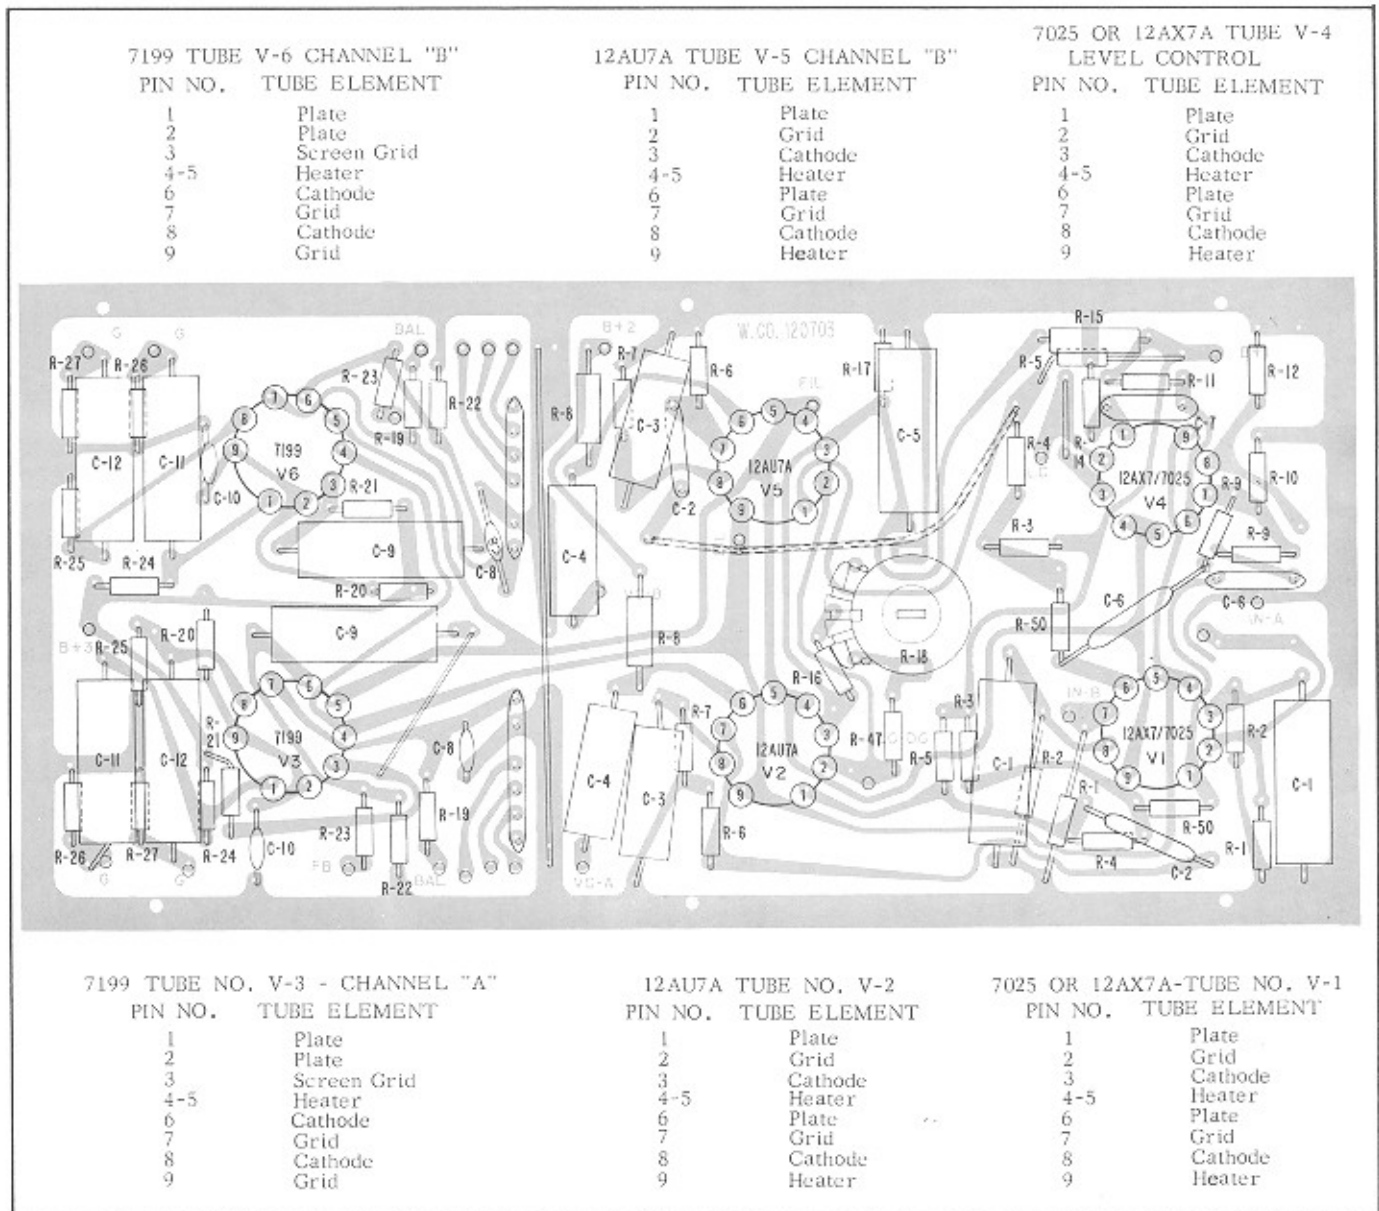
PRINTED CIRCUIT BOARD, MODEL 545 DUAL CHANNEL AMPLIFIER, ASSEMBLY NO. 123855
